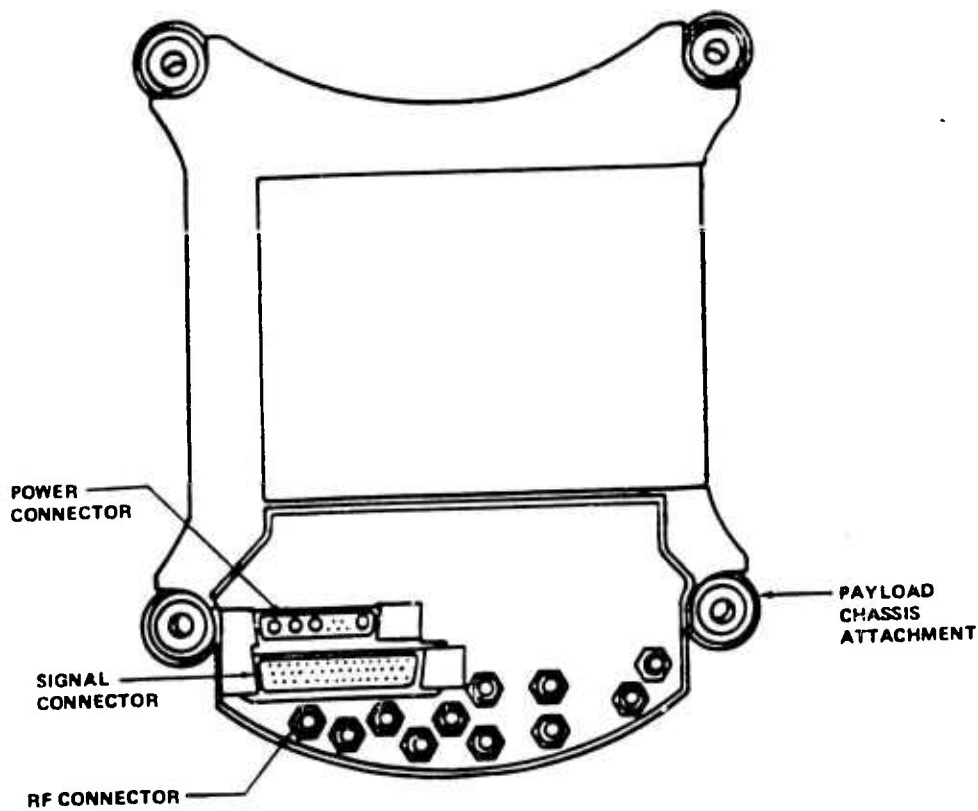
Payload Chassis Attachment and Electrical Disconnect
